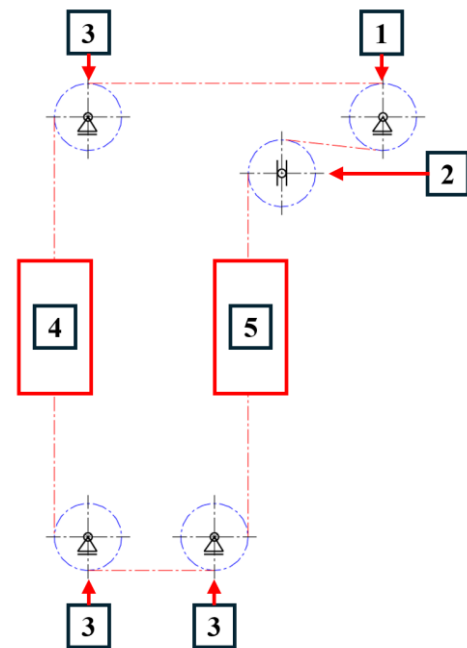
Z axis kinematic diagram where: 1 – Drive wheel, 2 – toothed belt tension wheel, 3 – idler wheel, 4 – Z axis carriage, 5 – counterweight
